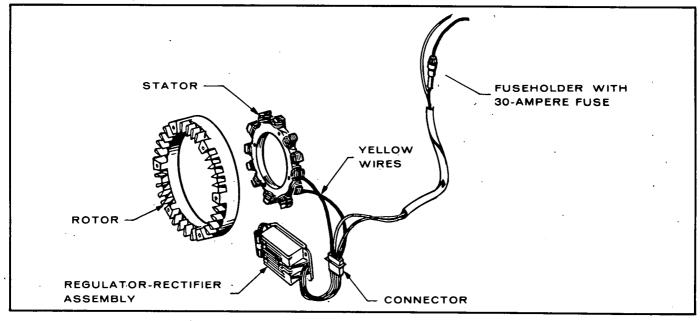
FLYWHEEL ALTERNATOR (BEGINNING WITH SPEC T)
